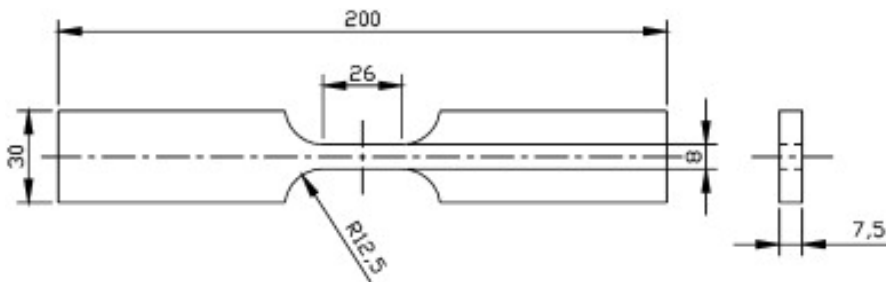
Uniaxial smooth dog-bone specimen: technical representation (dimensions in mm).
